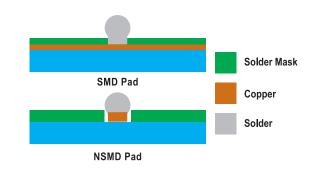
Recommended PCB copper pattern for mounting Pulse BGA device.
